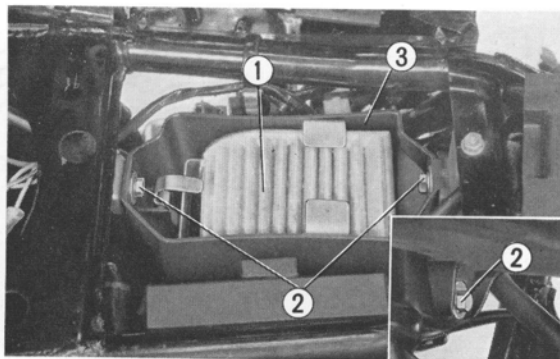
① Air cleaner element ② 6 mm bolts ③ Air cleaner case
